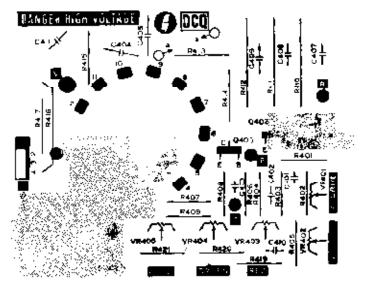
Main PC Board Assembly (Foil or Circuit Side)
